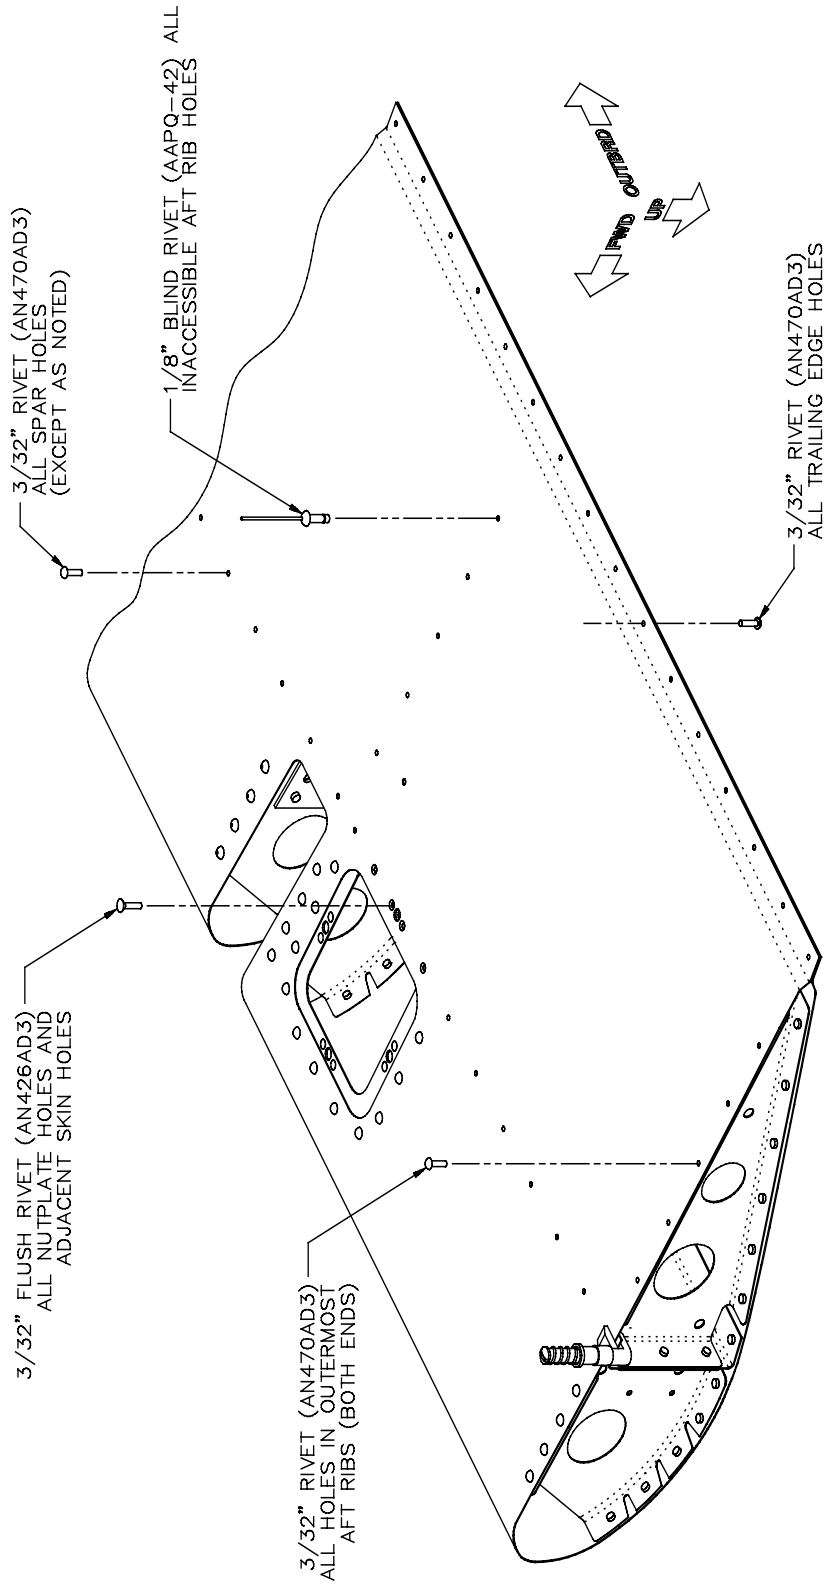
Riveting the Skin to the Lower Flanges of the Spar and Aft Ribs
